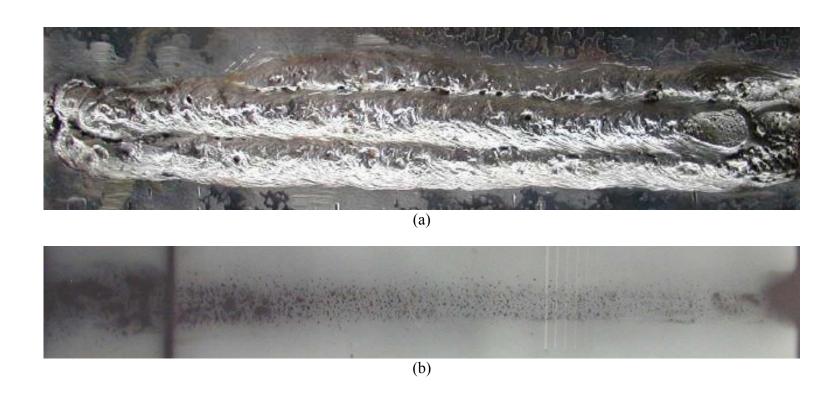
(a) V-groove wet weld deposited with E7024 electrode type on A572 Gr. 50 steel at 50 m and (b) its radiographic image.
